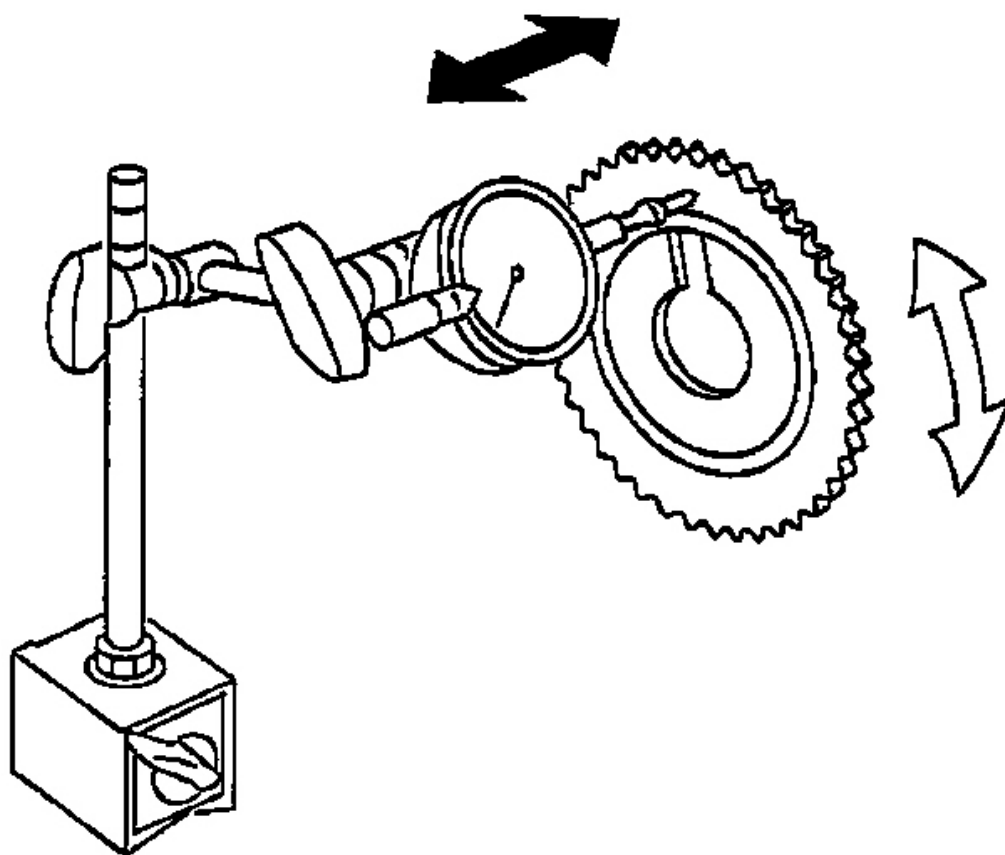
Checking Camshaft & Cylinder Head Dimensions For Camshaft End Play
